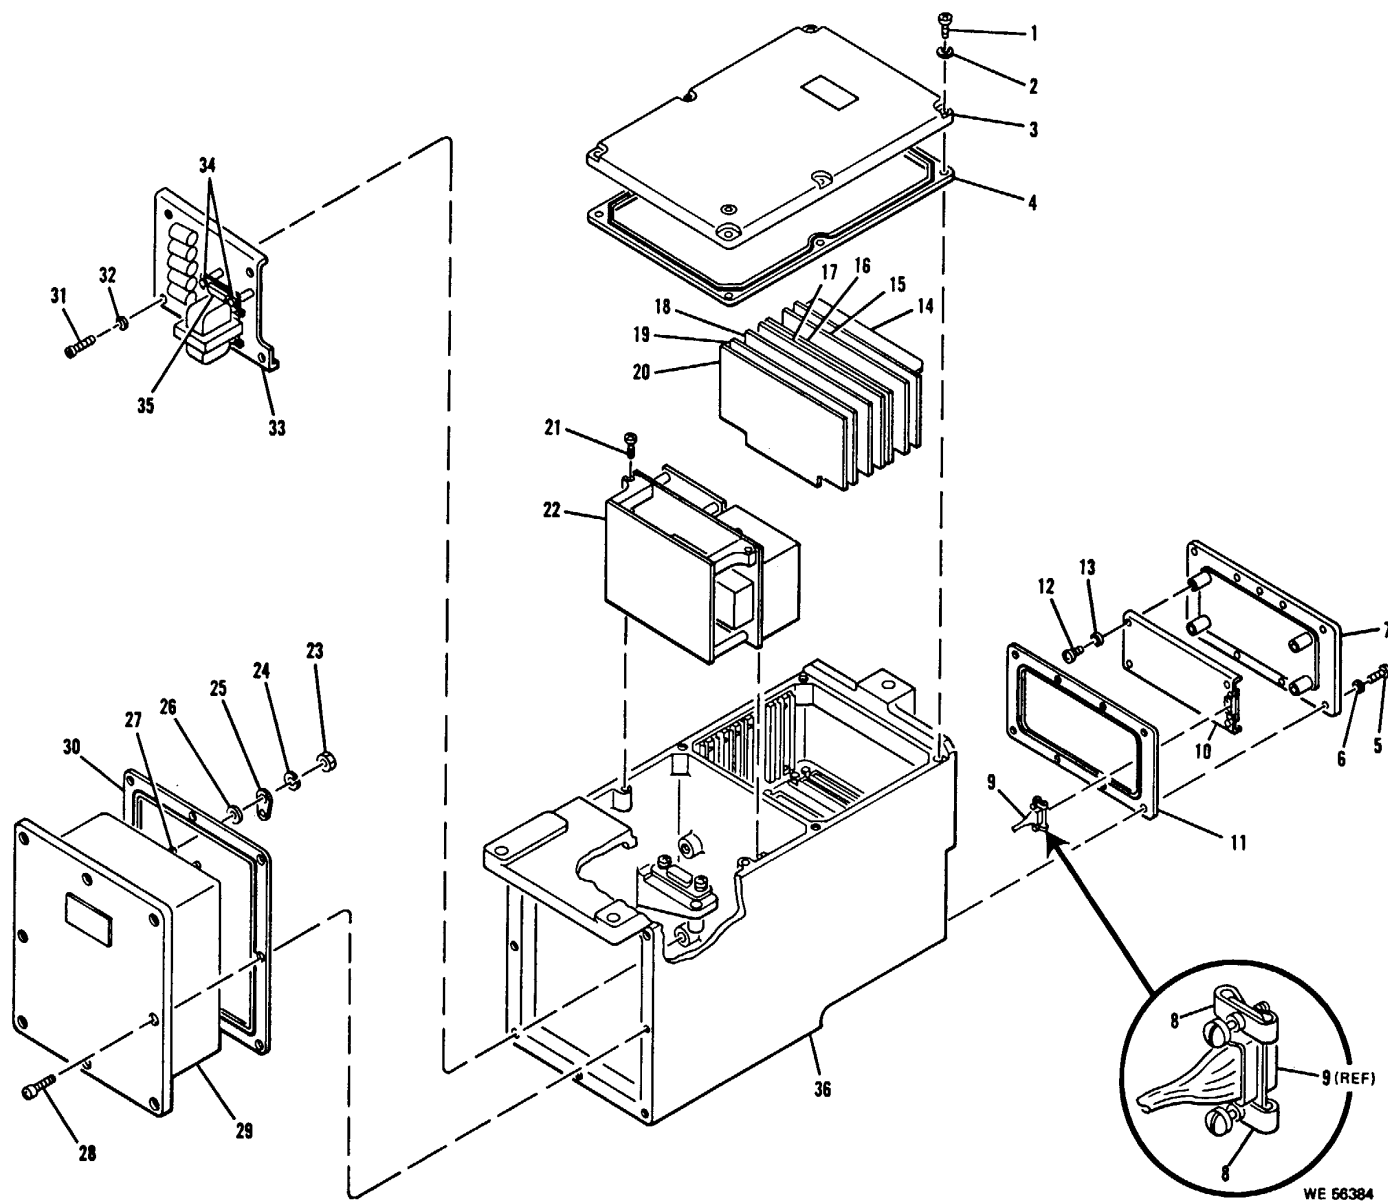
Disassembly of Laser Power Supply Control C-9135/VVG-1 (A77).
